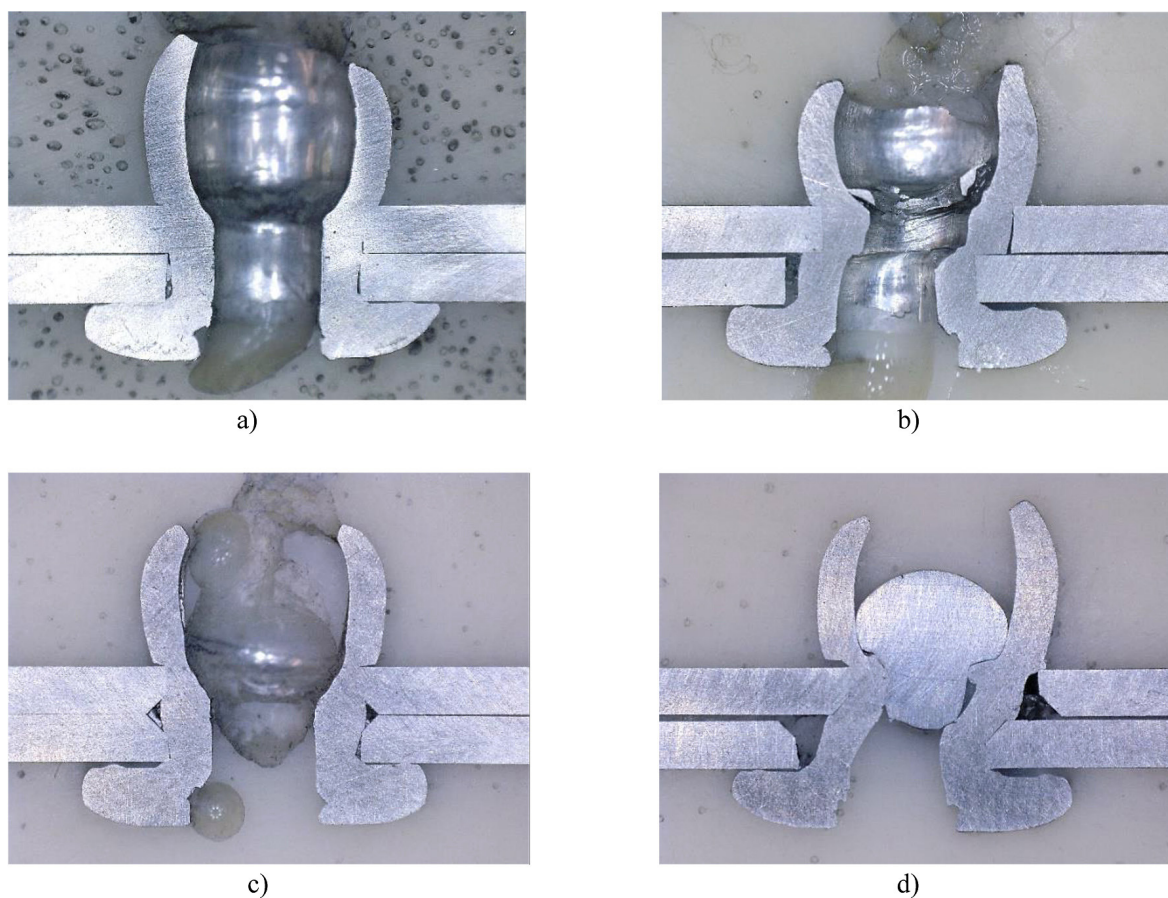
Axial section of the joints: A0, F = 500 N (a); A0, F = 900 N (b); A05, F = 500 N (c); A05, F = 1100 N (d).
